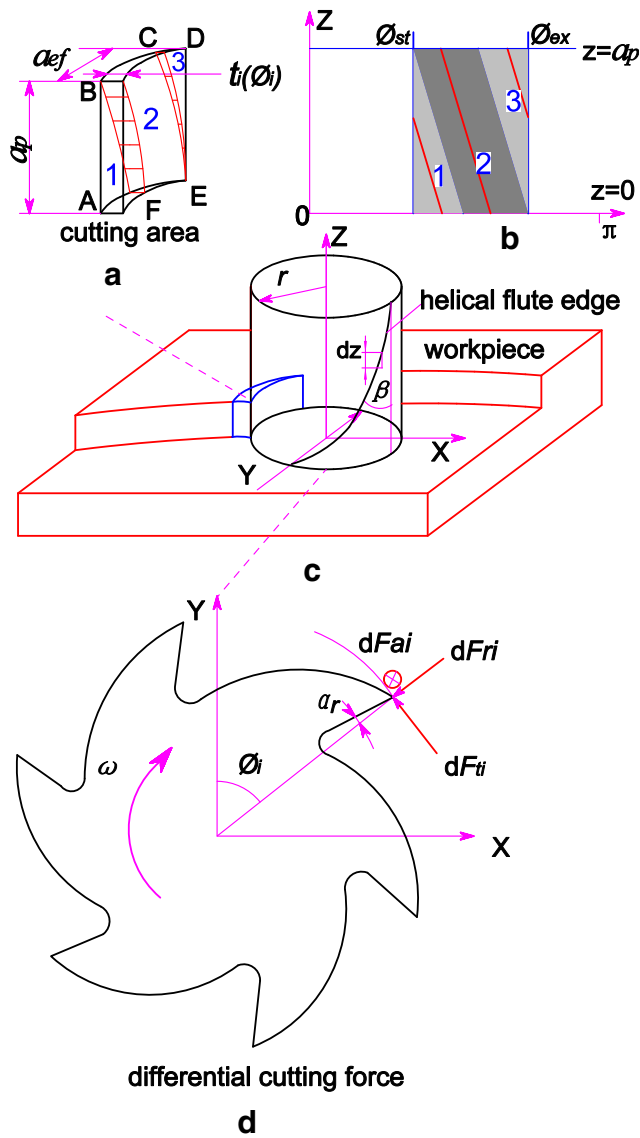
Force analysis of the helical end-milling cutter in the cutting zone
